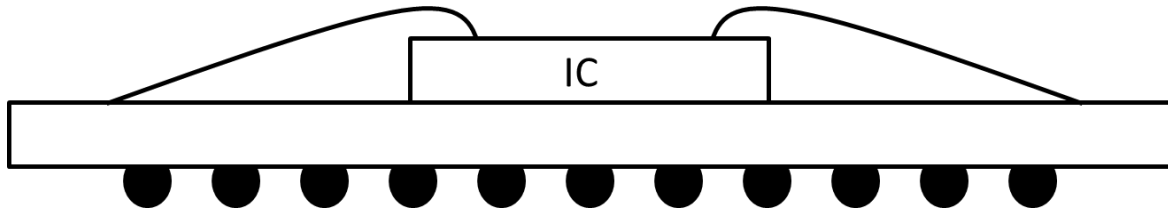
Wirebonding the IC to the BGA 272 package
